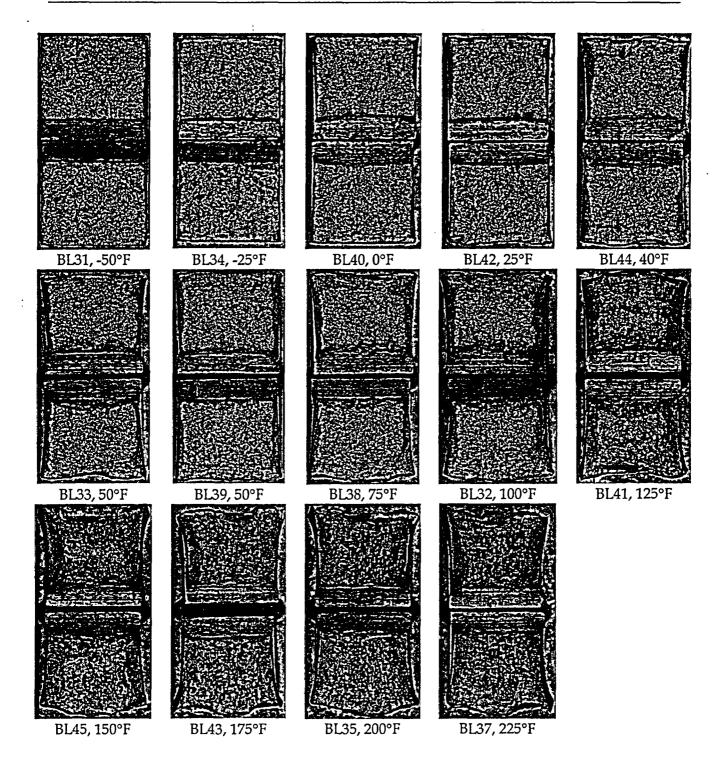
Charpy Impact Specimen Fracture Surfaces for Vogtle Unit 2 Reactor Vessel Lower Shell Plate B8628-1 (Longitudinal Orientation)
